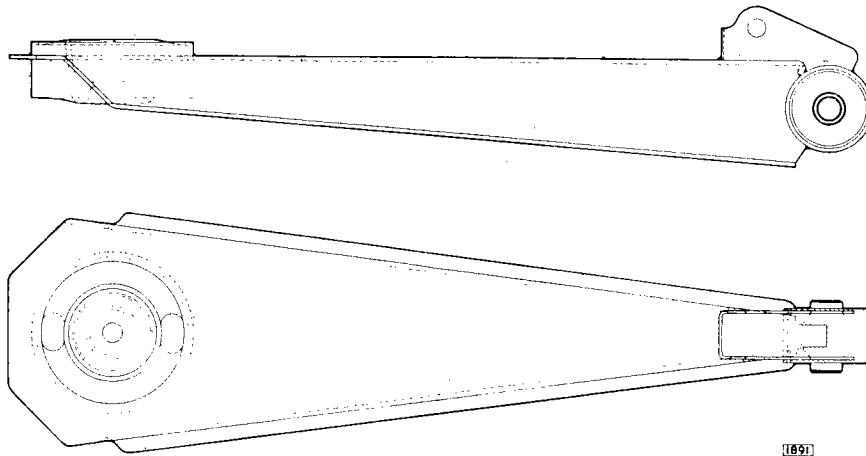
Showing the position of the mounting rubbers in the radius arm
